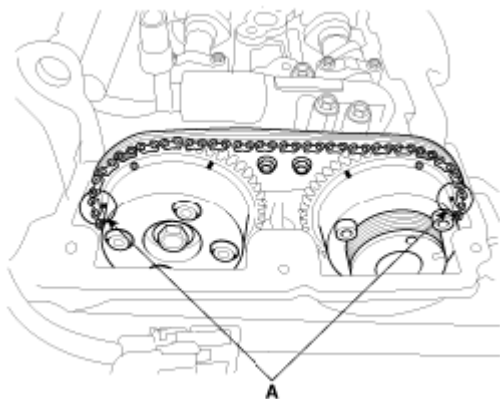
Identifying Mark Of Camshaft Timing Sprockets (1 Of 2)
